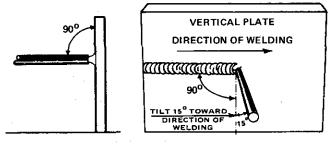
Horizontal Weld Beads - Vertical Plate
